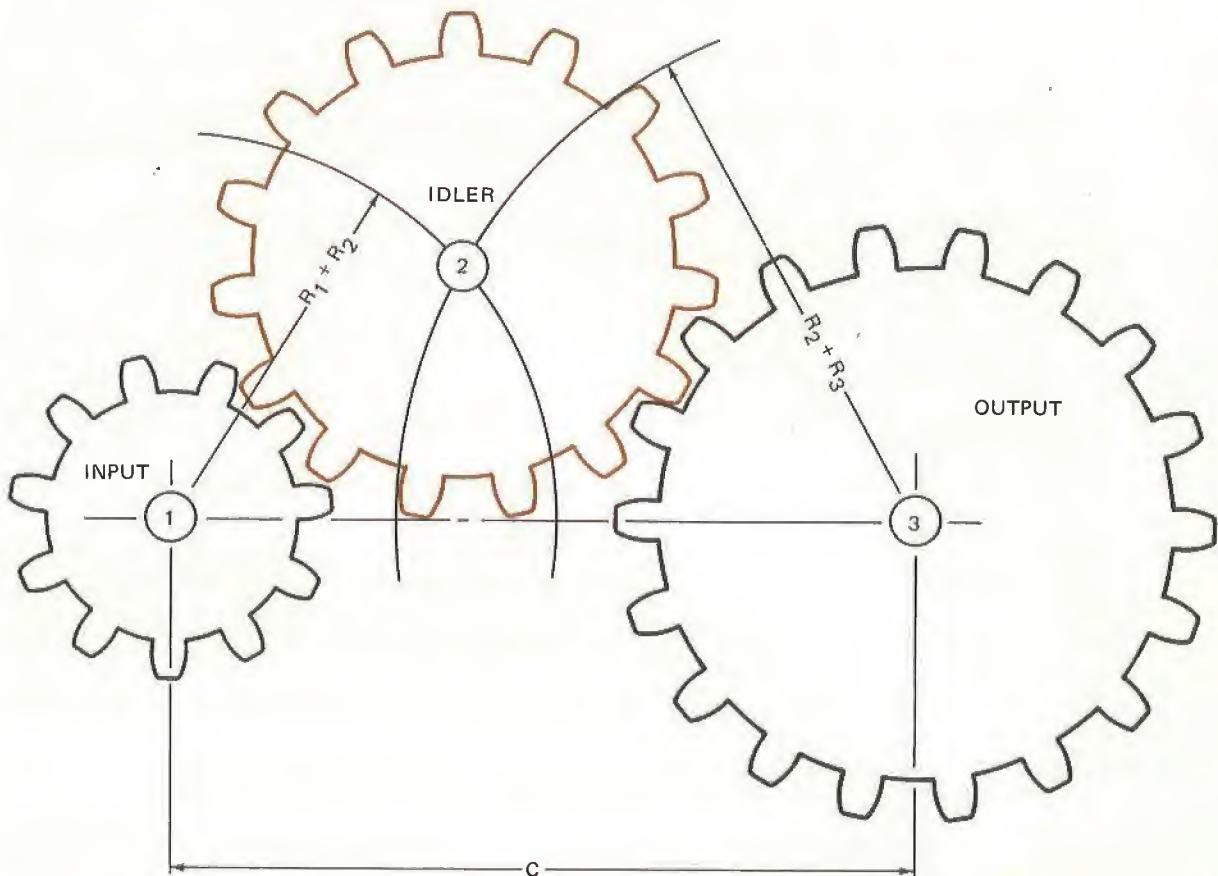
Locating "Off-Line" Idler Gear Center
